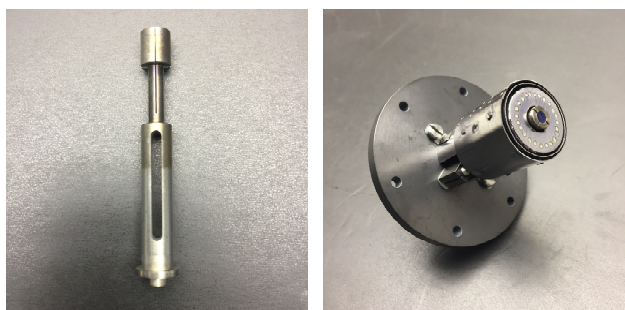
Molybdenum sleeve (left) and modified cathode assembly (right).
